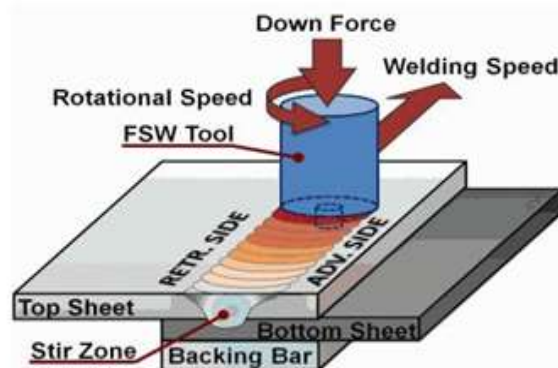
Schematic Diagram of Friction Stir Welding[2]
